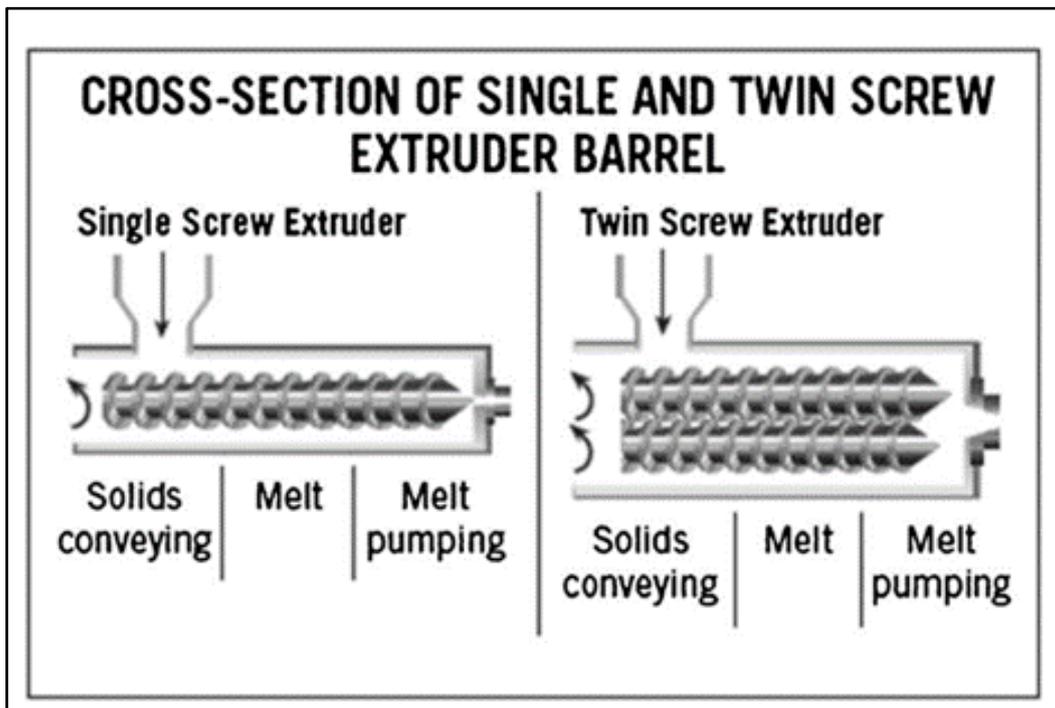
Cross-section of single- and twin-screw extruders [3]
